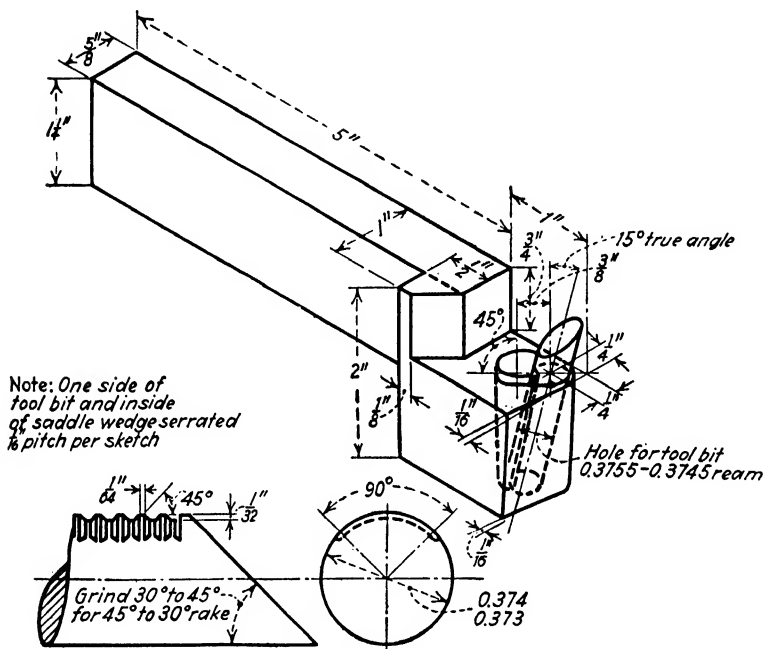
Serrations in this wedge-lock tool holder permit heavy and intermittent cutting, and besides the tool bit is not weak as is an ordinary bit ground for aluminum.
